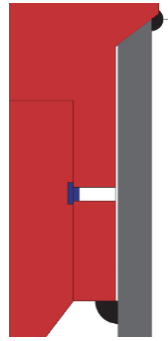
DETAILS OF THE PRESSURE PORT ON THE CASING HEAD TO MAKE THE PRESSURE TEST
